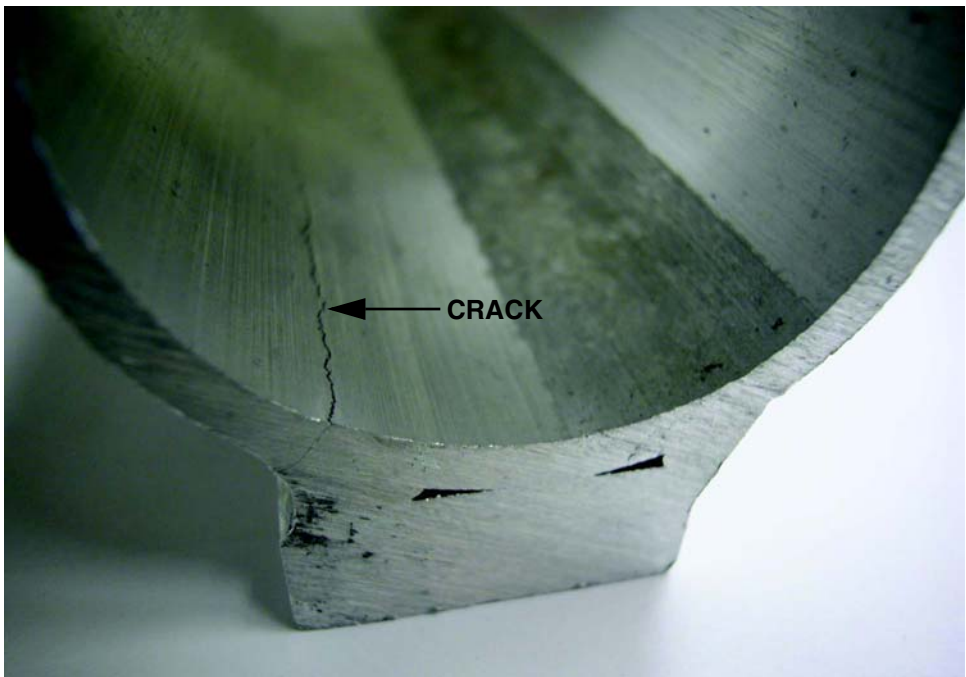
A Longitudinal Crack Can be Seen in the Inside of this Pipe on the Opposite Side of the Fillet Weld
